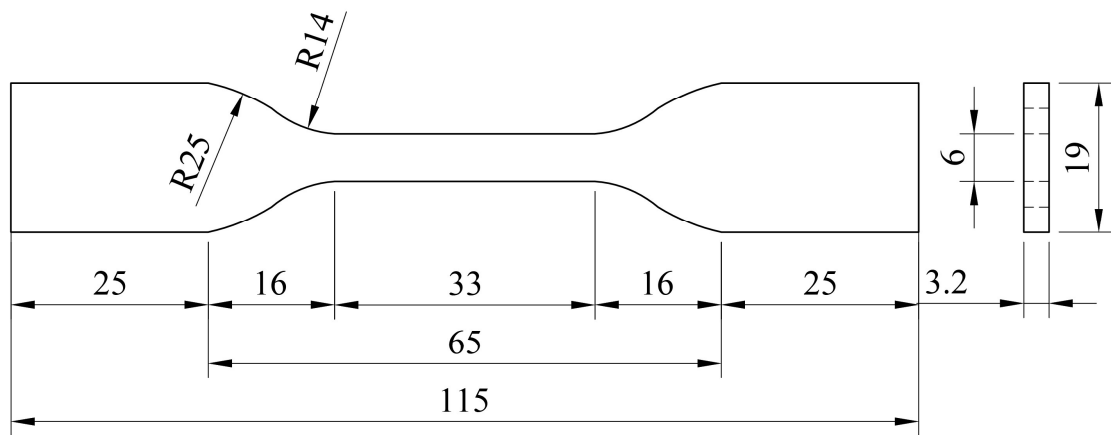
Geometry and dimensions of the tensile test specimen (units in mm) according to ASTM D638 Type IV standard.
